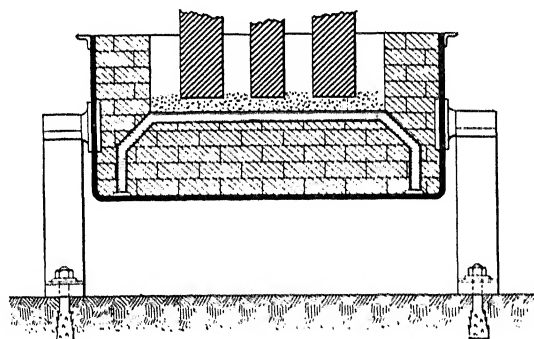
SECTIONAL ELEVATION OF GIROD'S FURNACE.
